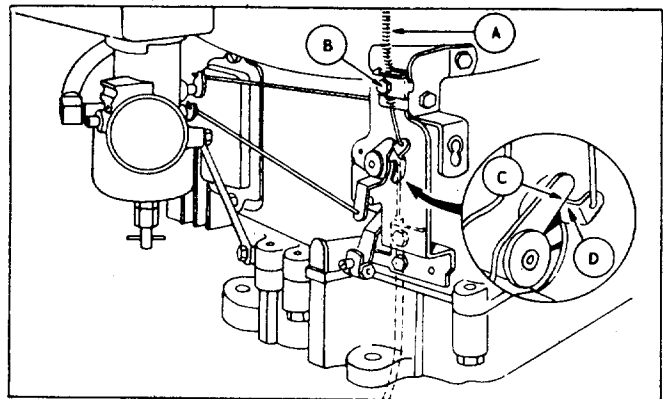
THROTTLE CONTROL ADJUSTMENT
